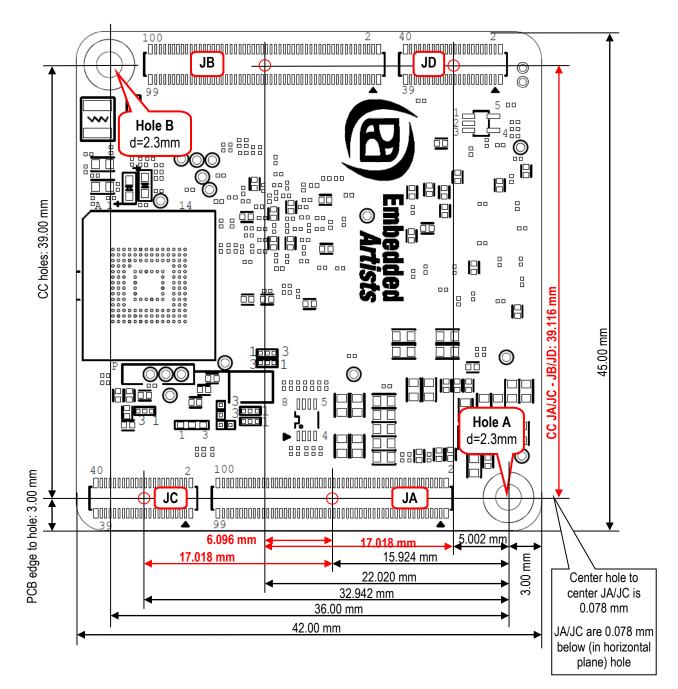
iMX8M Nano uCOM Board Mechanical Outline, View from Bottom Side
